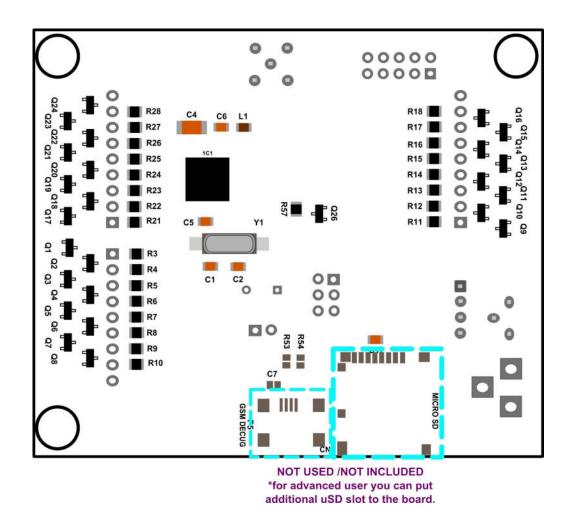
Major parts presentation of GSM Remote I/O kit. (Bottom view)
